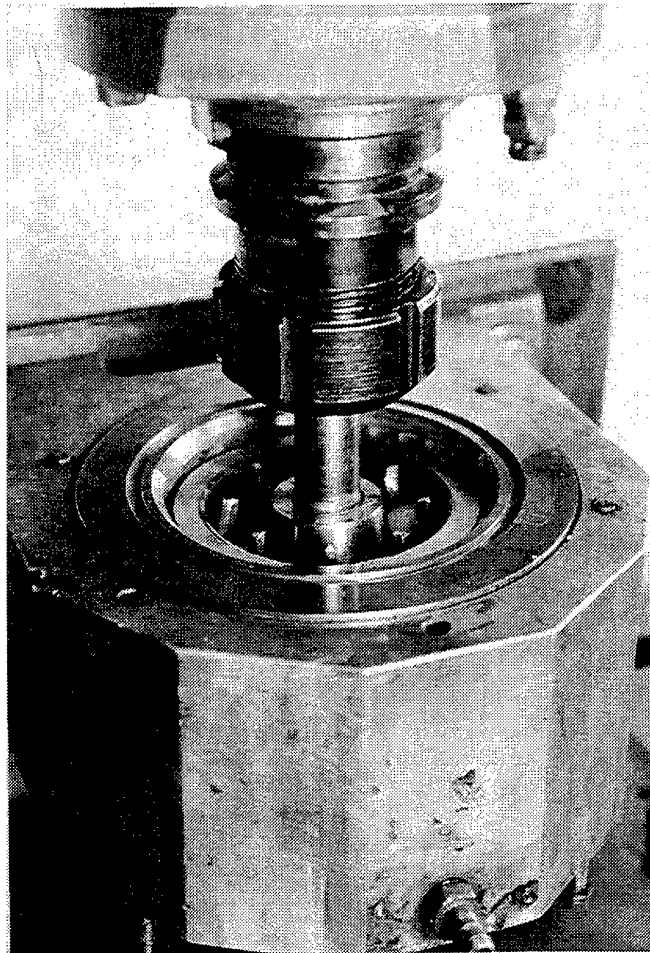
Photograph of the magnetic fluid grinding apparatus for finishing ceramic rollers.
